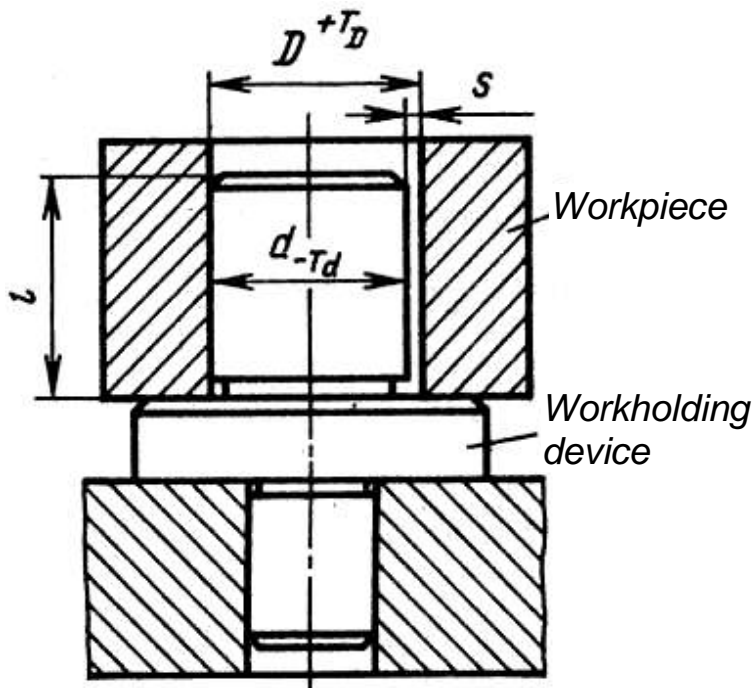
Scheme for mounting of workpiece on cylindrical finger
